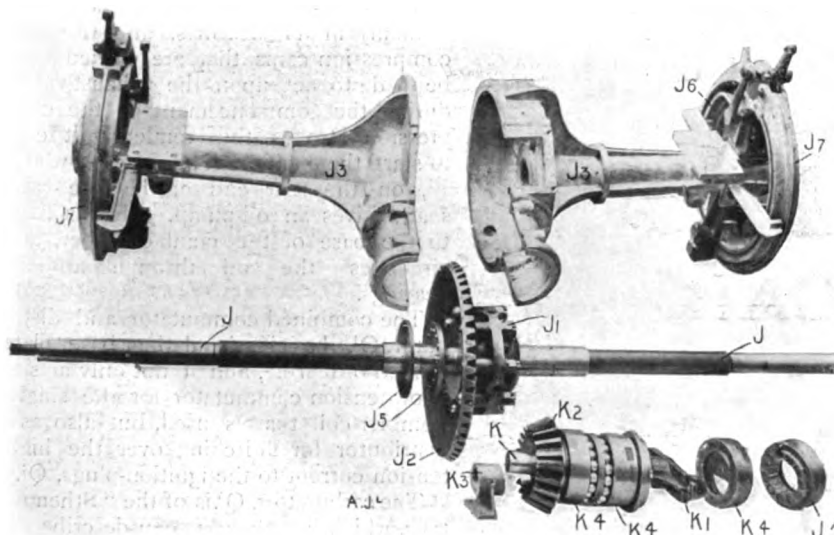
The live-rear-axle of the 3-cylinder Belsize Car, taken to pieces to show its internal construction.
